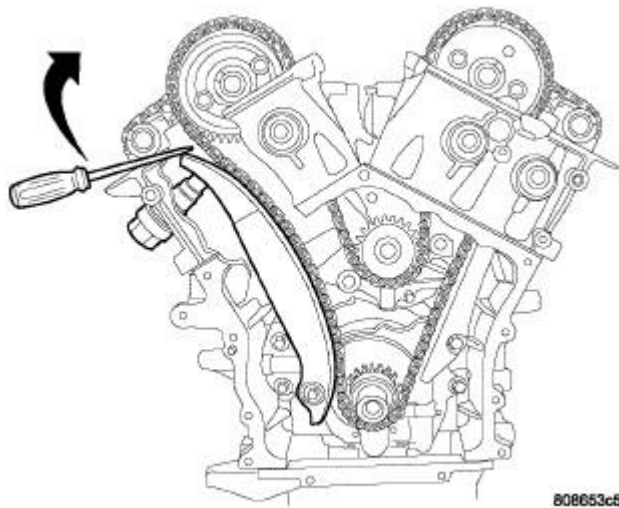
TIMING CHAIN TENSIONER ACTIVATING
